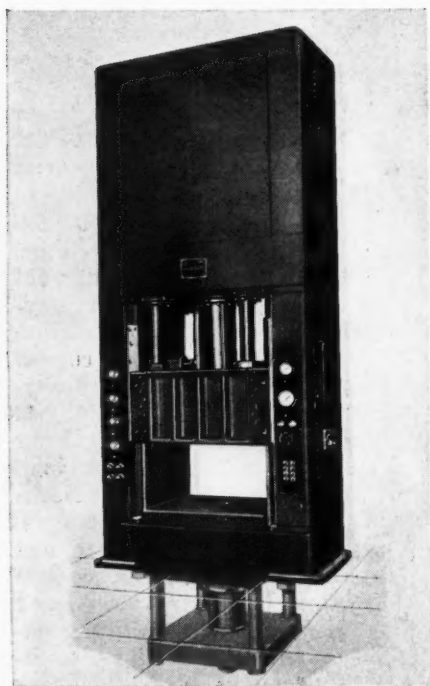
Watson-Stillman Drawing Press with Cushion Cylinder
